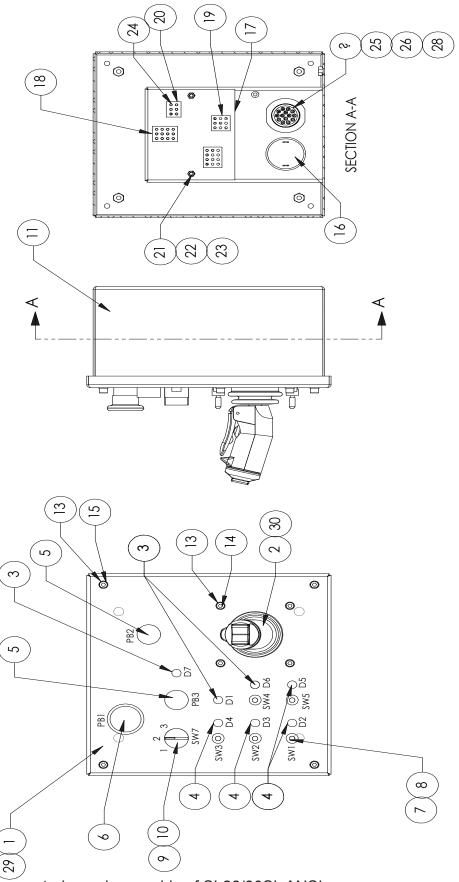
Upper control panel assembly of SL26/30SL ANSI
